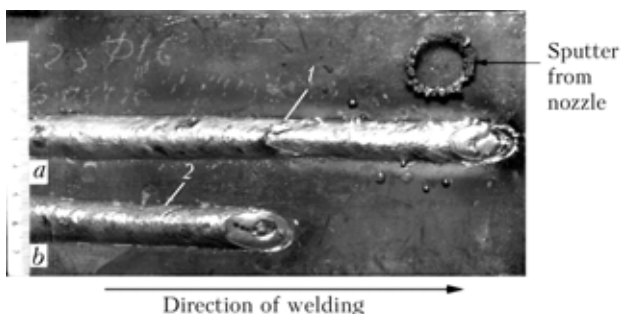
Appearance of weld metal in CEPAW of steel St3sp using Sv-08G2S wire of 1.6 mm diameter in mixture of gases Ar + 18 % CO₂ (welding speed is 16 m/h, pulse duration is 3.4 ms): 1 — $U_n = 376\text{--}380$ V (first half of weld), 342–354 V (second one); $K_s = 6.5\text{--}7.0\%$; 2 — $U_n = 376\text{--}380$ V, $I_{\text{mean}} = 250$ A, $U_{\text{mean}} = 25$ V; frequency of pulses is 82 Hz, $K_s = 1.0\text{--}1.5\%$
